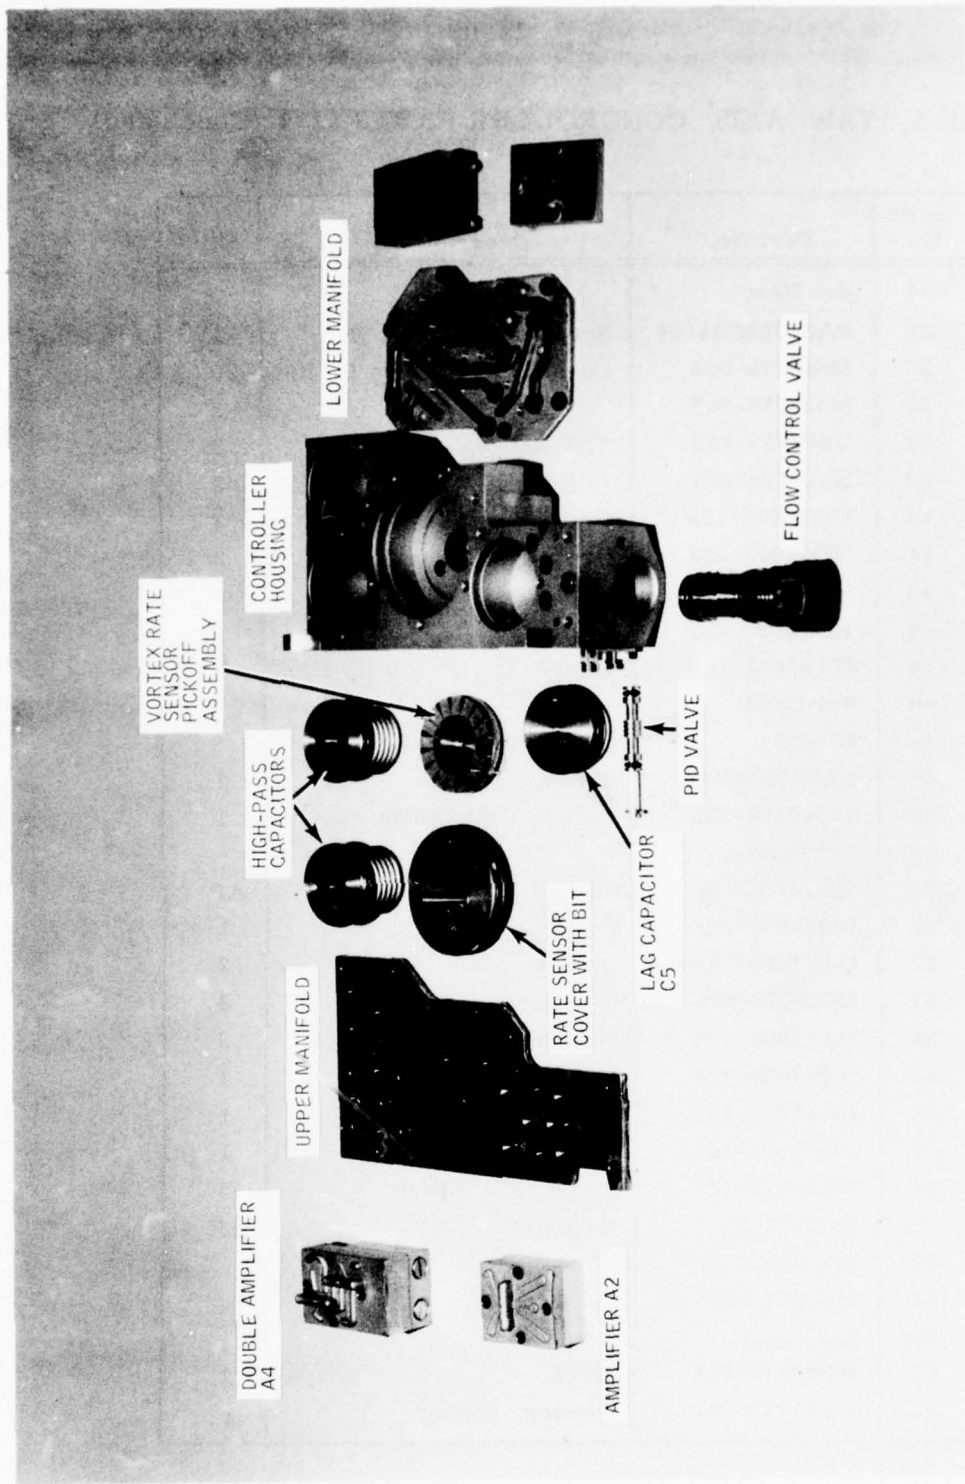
YG1143 - Yaw Axis Controller Exploded View.
